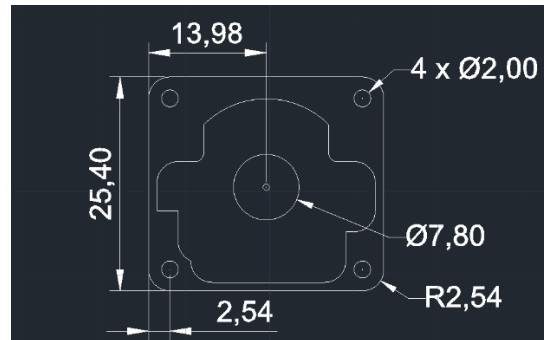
AutoCAD design of Holder for Adafruit AS7262 with a hole representative of the photodetector entrance.
